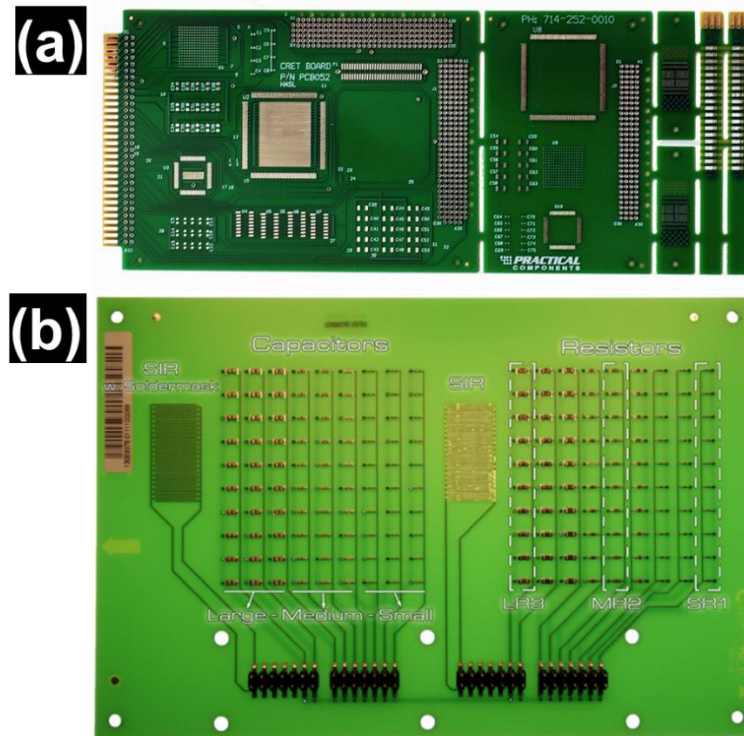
(a) Test PCB board for component level testing: (a) IPC-B-52, (b) Test PCB designed to study ECM failure [30].
